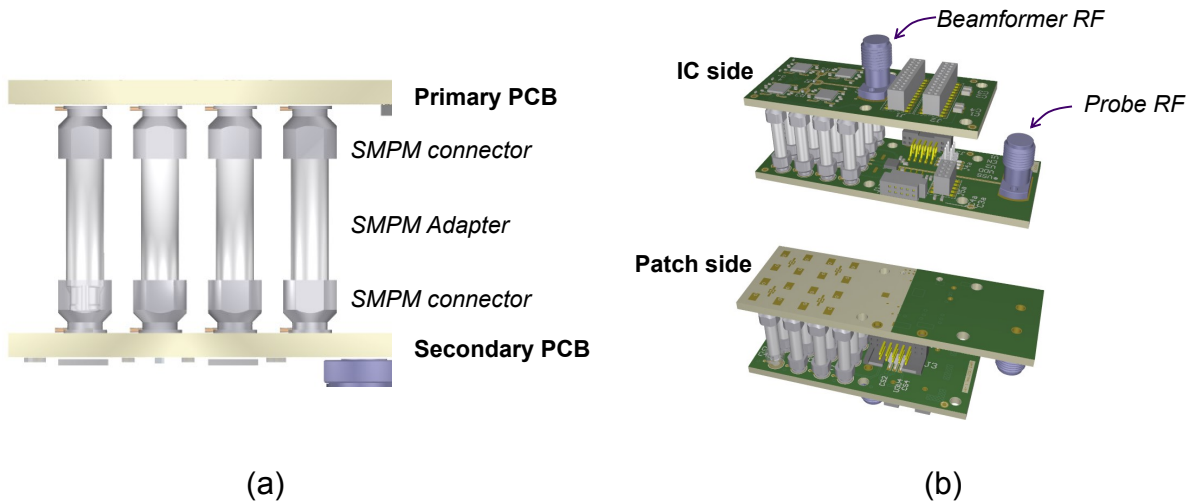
Assembly of the primary and secondary PCB with SMPM adapters
